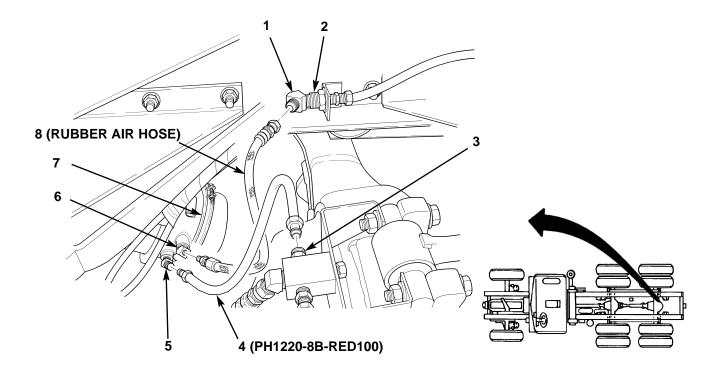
Installing Tube and Hose Assembly on Service Brake Chambers.
